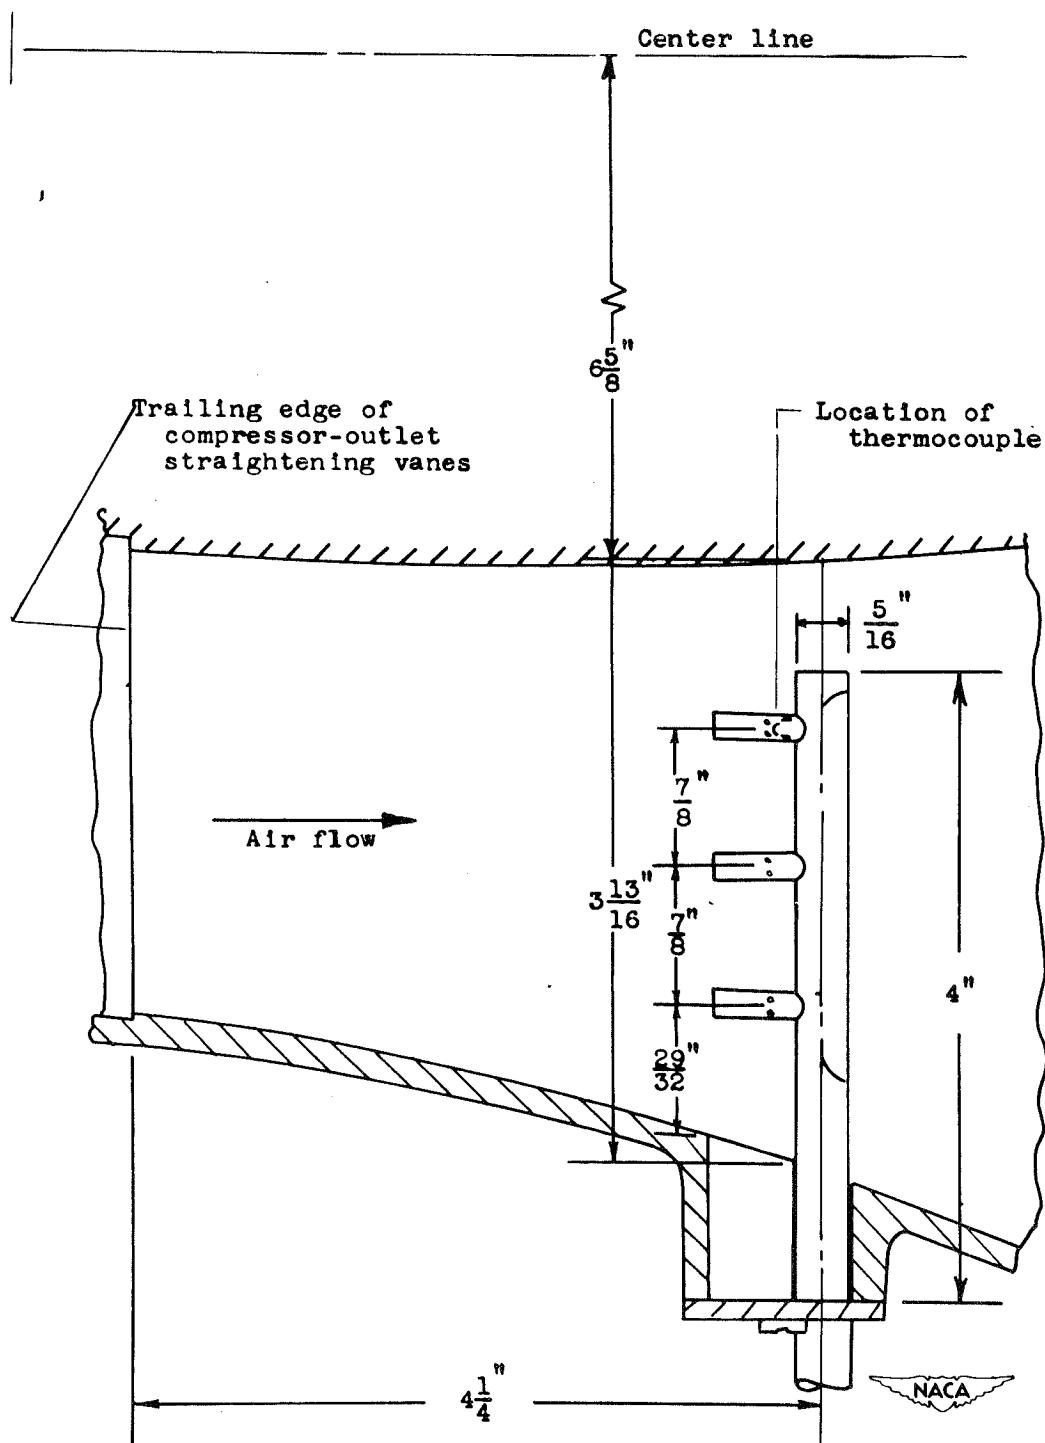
Instrumentation at compressor outlet, station 4, $3\frac{3}{16}$ inches behind trailing edge of compressor-outlet straightening vanes.
